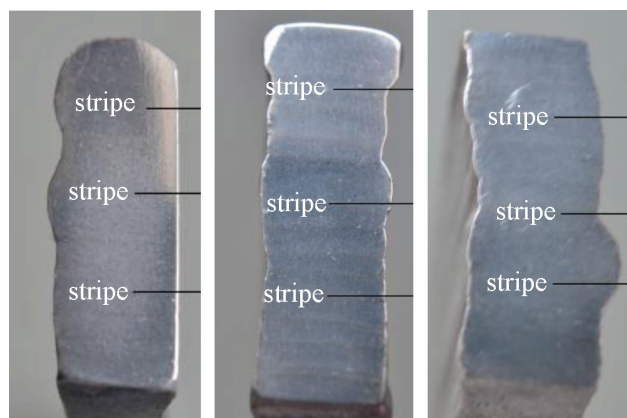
Micromorphology of specimens: a) Specimen 1, b) Specimen 2, c) Specimen 3
